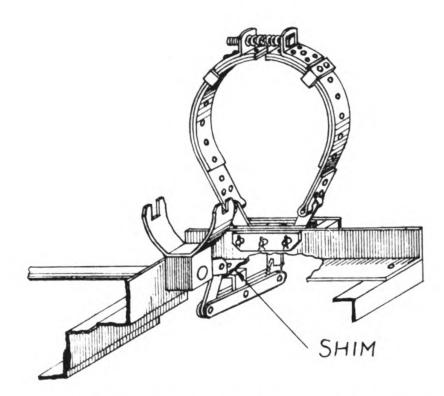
Showing how to shim the linkage for the brakes of the crawler control.
